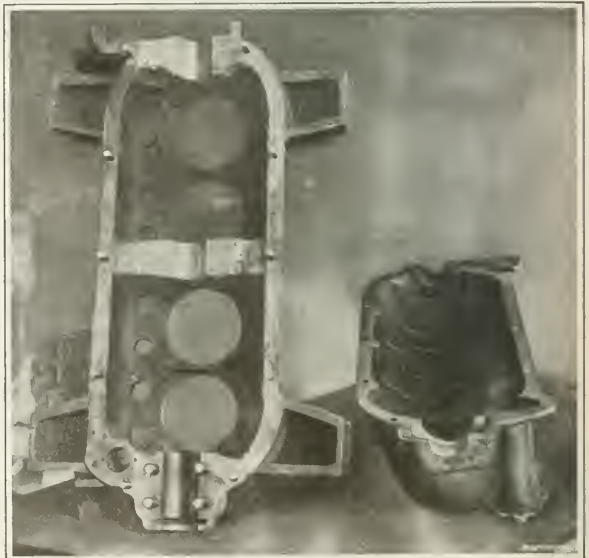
Both Halves of Crank-case Machined and ready for Assembling
